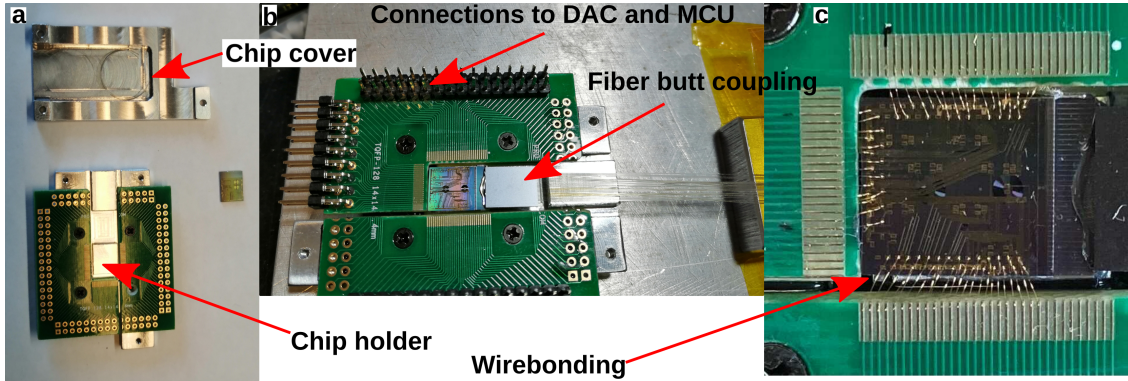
Picture of the split-and-delay line chip. a) Overview of different components. From top to bottom: Chip cover, photonic chip sample ( $11.75 \times 9.00 \text{ mm}^2$ ), base-plate with mounted PCB (printed circuit board). b) Assembled and fiber-coupled chip incl. pin connections to a 16-bit digital-to-analog converters (DACs, Analog Devices AD5370) and MCU. c) Chip sample after wirebonding.
